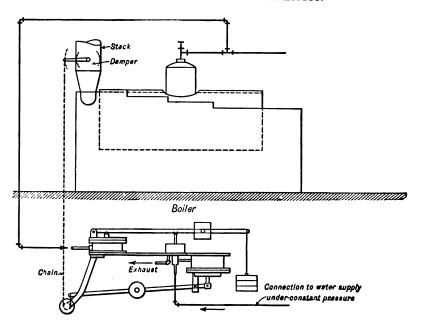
HYDRAULIC DAMPER REGULATOR.
